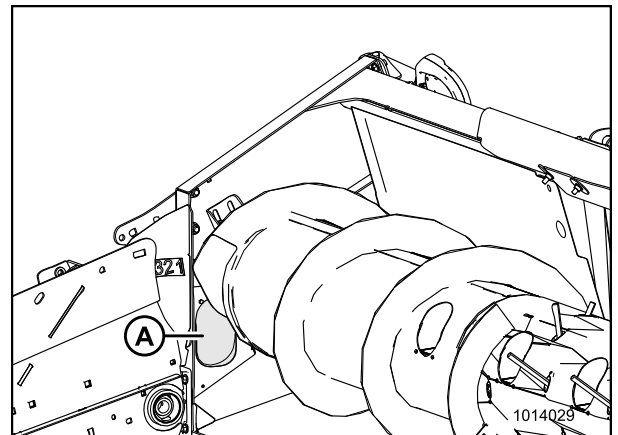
RH Header Height Sensor Access Panel (Auger Removed for Clarity)
